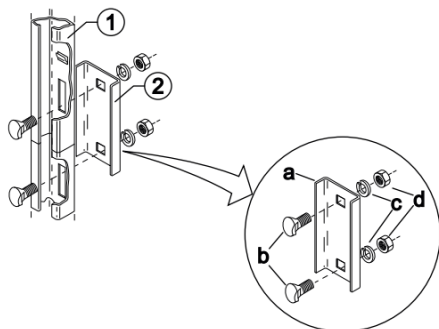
Rail Connector Assembly (P/N 506329 GALV.)
